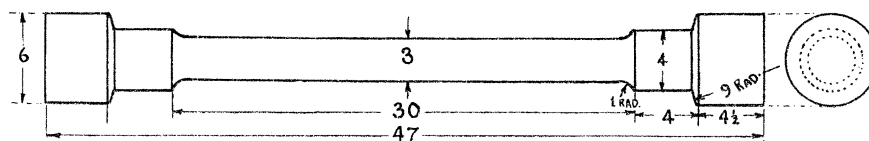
Dimensions of tensile test specimen in mm. Scale twice actual size.
